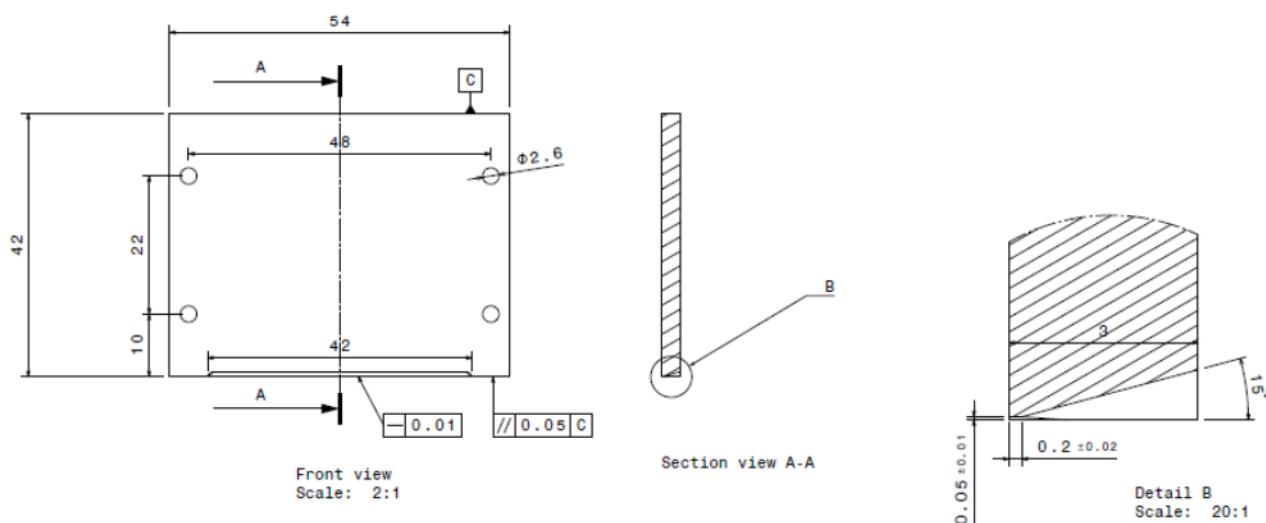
Scheme showing dimensions and tolerances of the graphite piece
